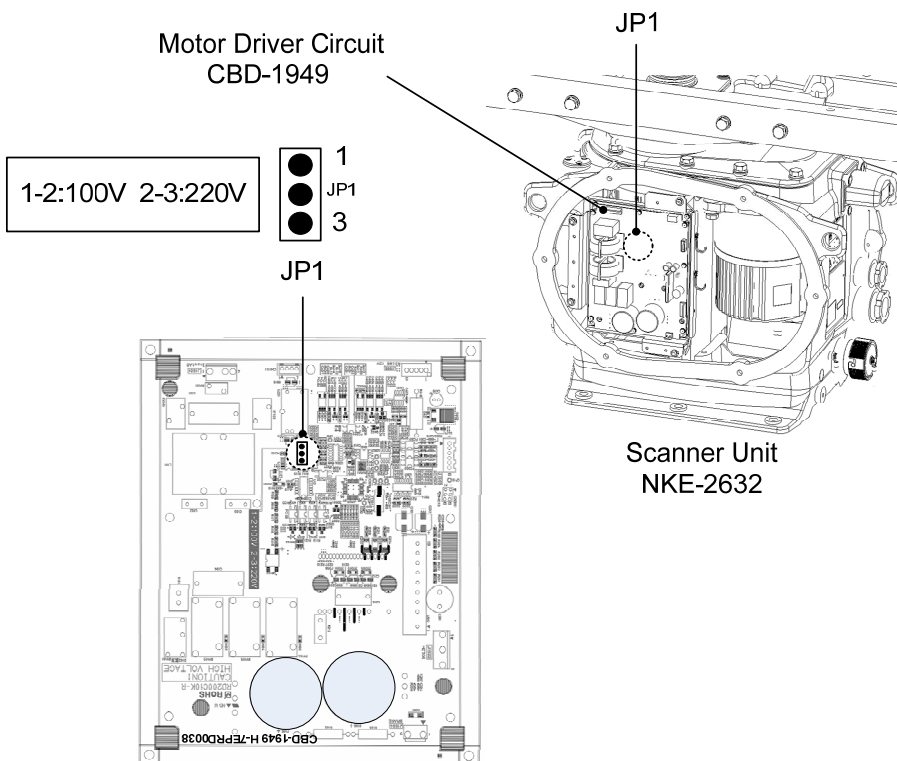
Motor Driver Circuit CBD-1949 in NKE-2632
